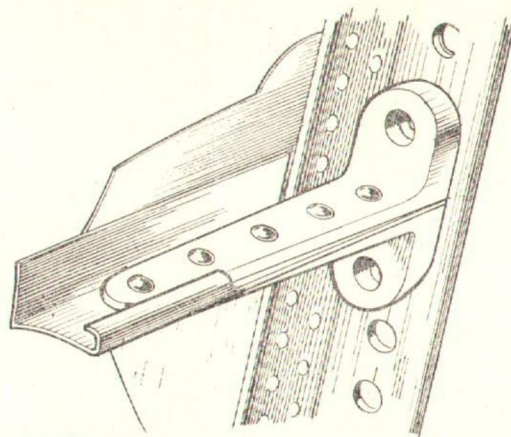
Stringer bracket at transport joint formers, rear centre section
